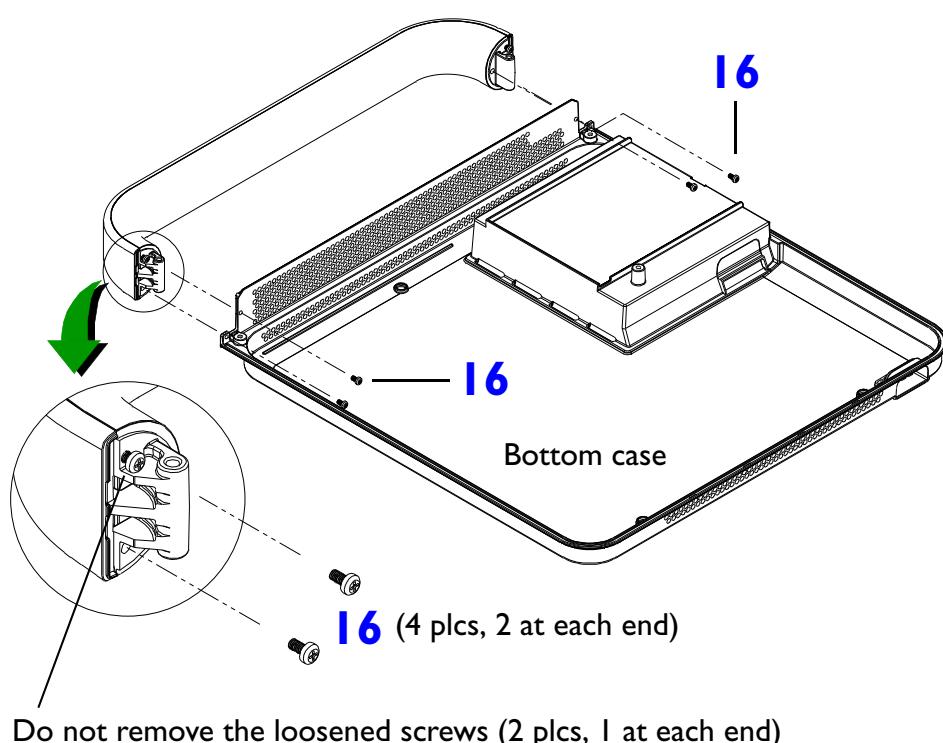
Removing the Bottom Case with Handle AssemblyNOTES
